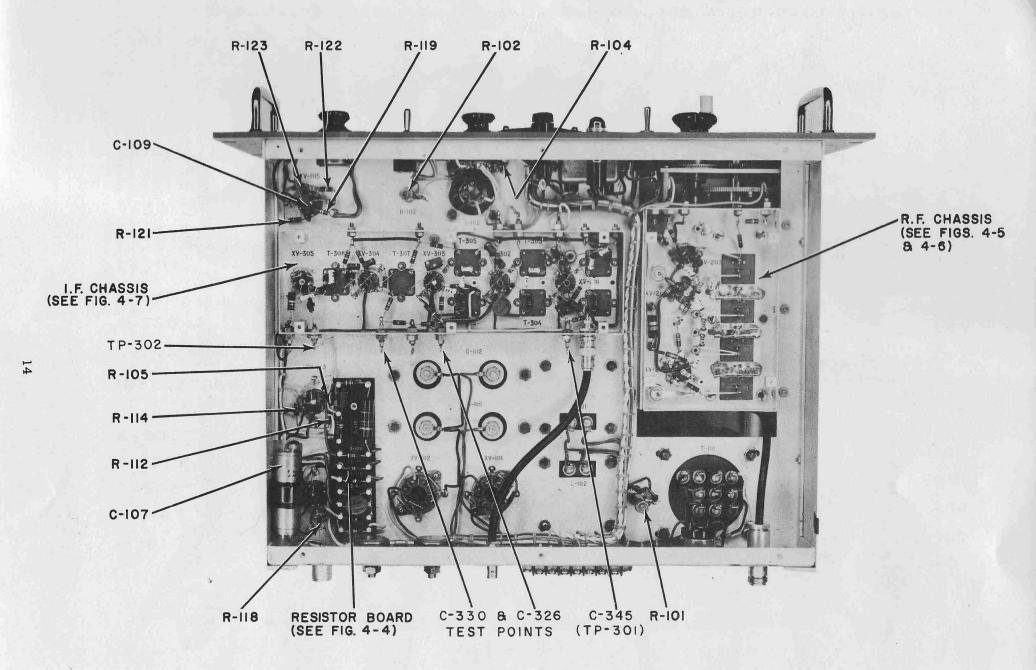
Models 1671-1674 Special Purpose Receivers, Bottom View, Dust Cover Removed.
